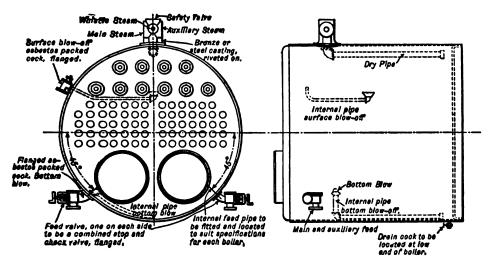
CONNECTIONS FOR INTERNAL FURNACE BOILERS.
